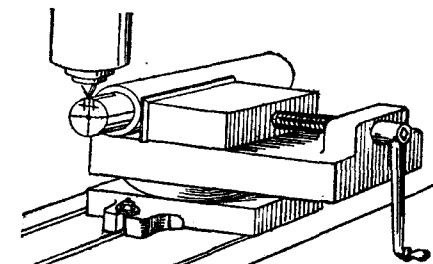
This is one way of centering the work with the spindle. It is necessary that the keyway be cut on the center of the shaft.
